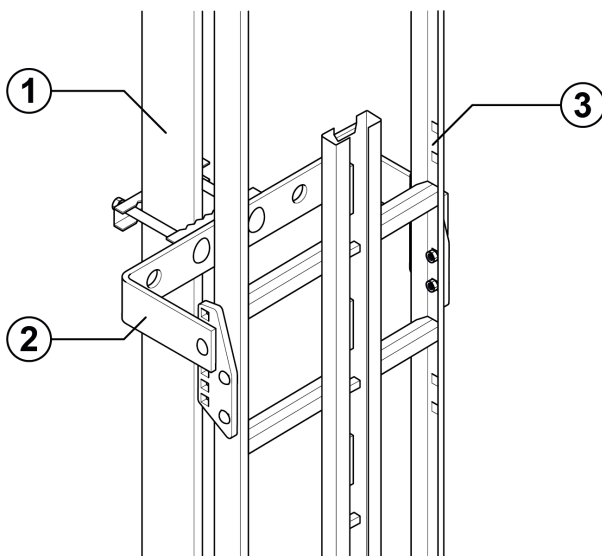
Standoff Corner Mounting Assembly (P/N 506398 GALV.)
